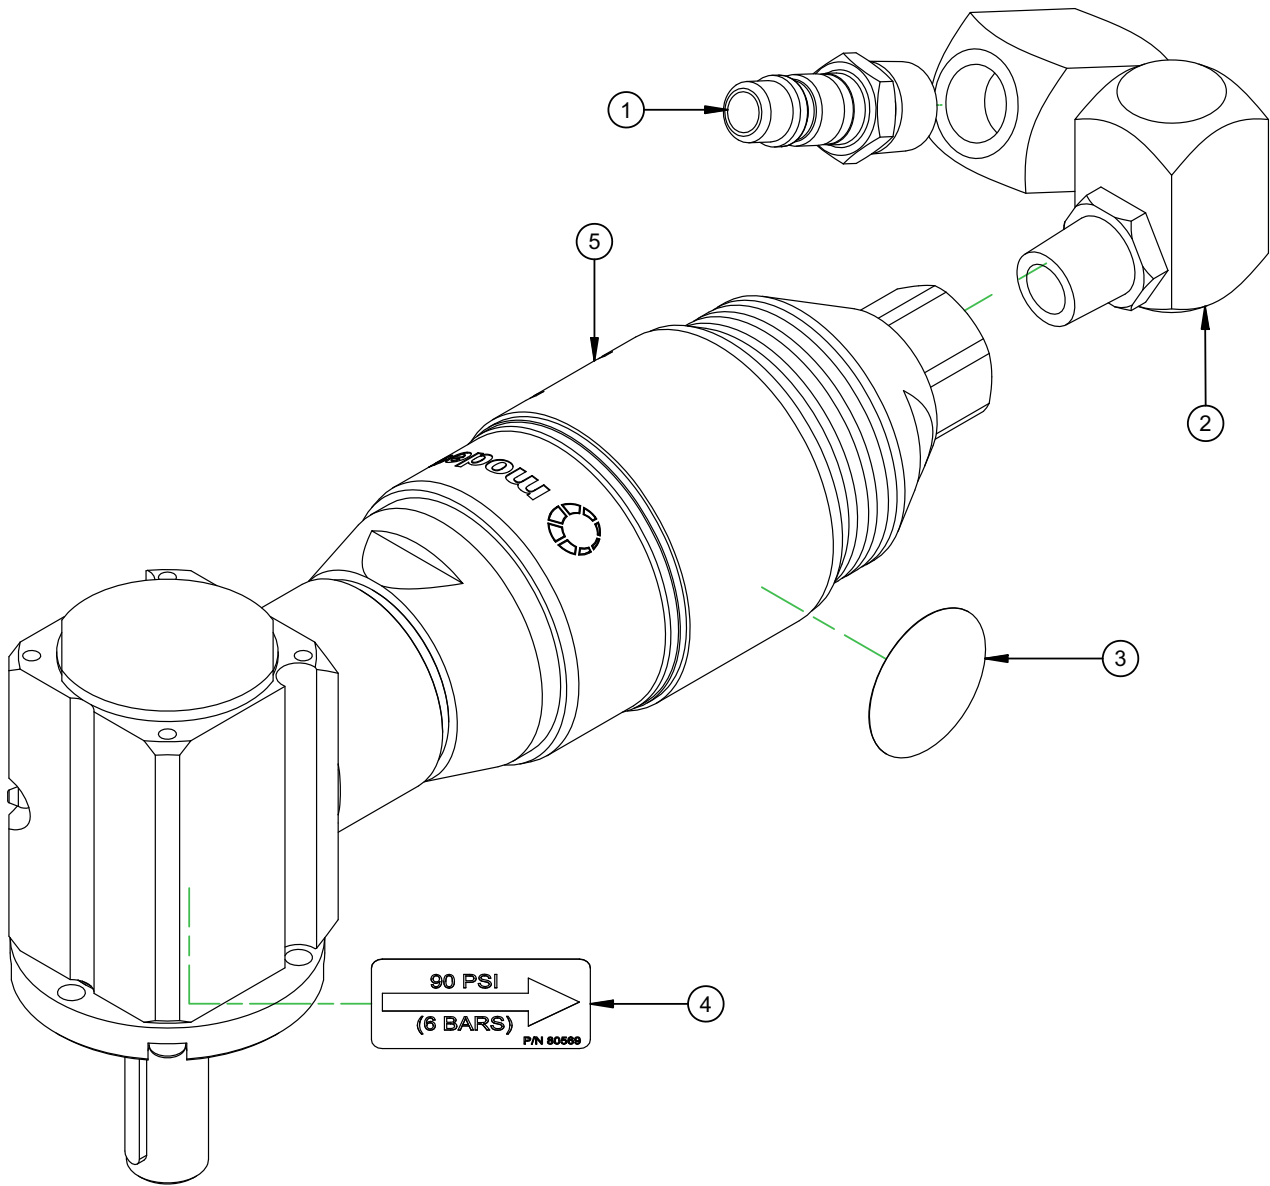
FF1200 1.07 HP STRAIGHT AIR MOTOR (P/N 80570)
